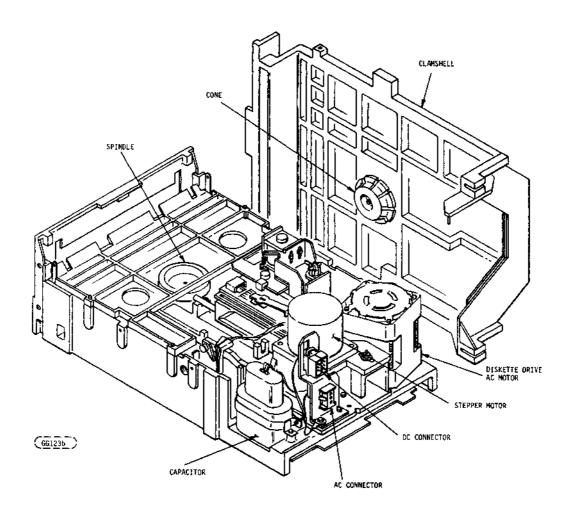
POSITIONING AND HEAD-LOAD MECHANISM, CLAMSHELL COVER RAISED.
